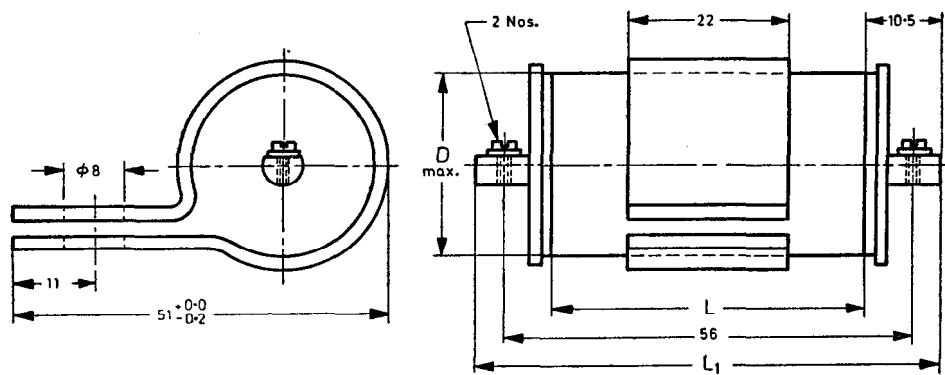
OUTLINE DRAWING AND DIMENSIONS
